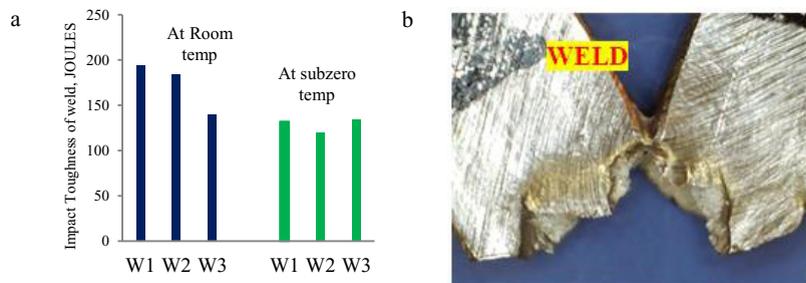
(a) Impact toughness of DSS weld (b) Cleavage fractured of DSS weld sample
